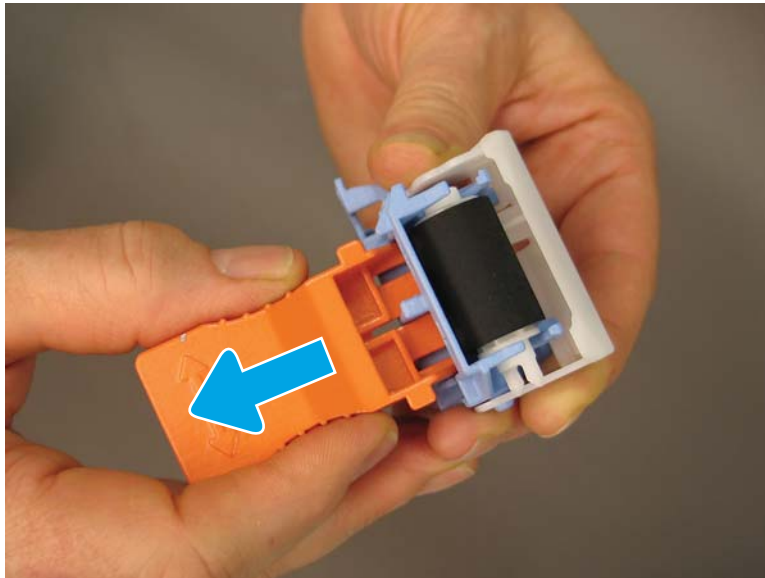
Tilt the tool down, and then remove the separation roller
